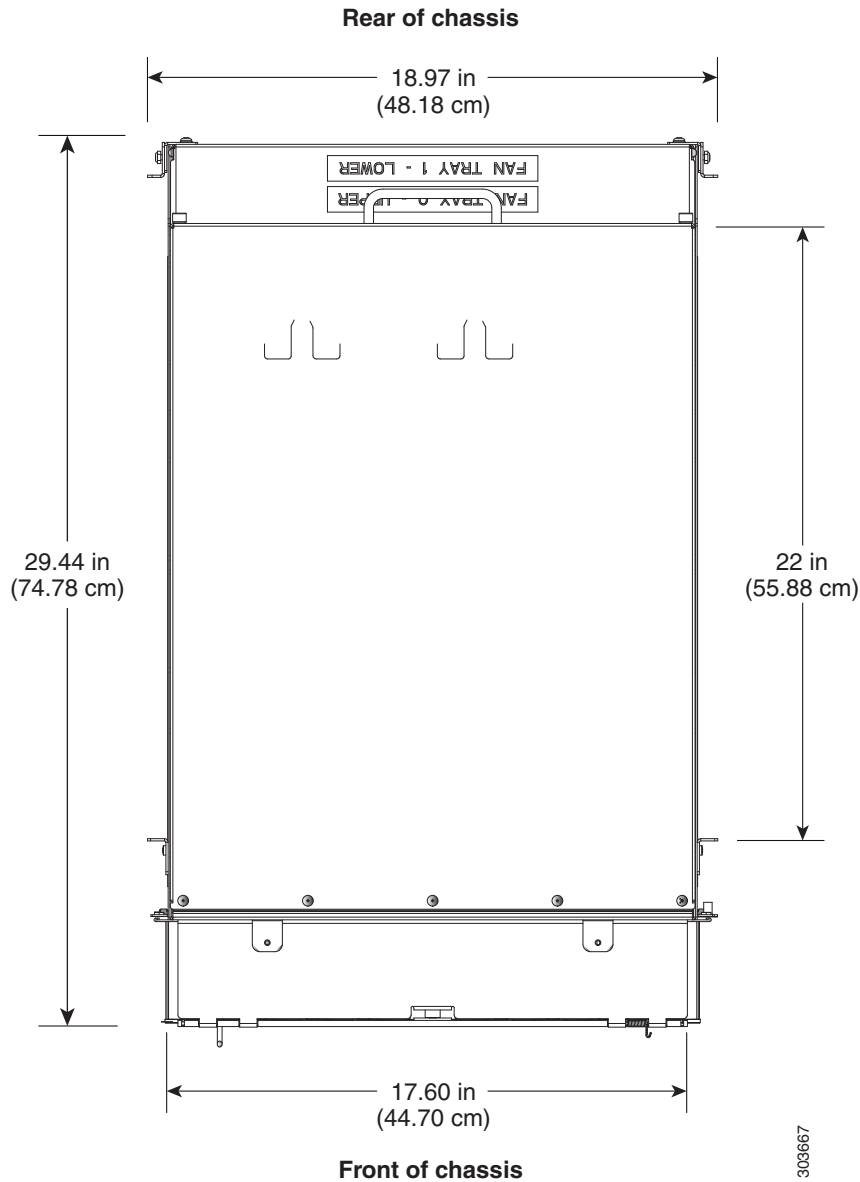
Cisco ASR 9922 Router Chassis Footprint Dimensions—Top Down View
